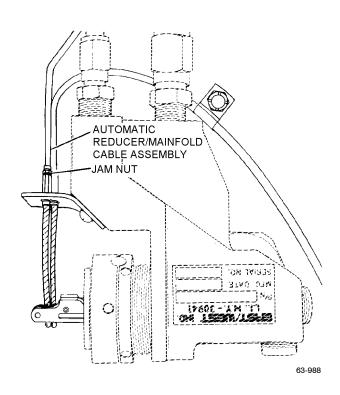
Reducer/Manifold Assembly P/N 741370-1 Cable Routing
